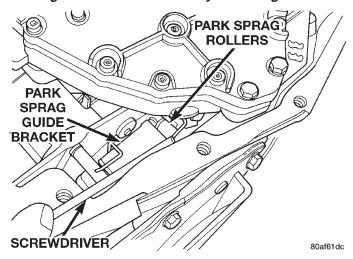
Push Park Rod Rollers from Guide Bracket NOTE: To ease removal of the valve body, turn the manual valve fully clockwise.
